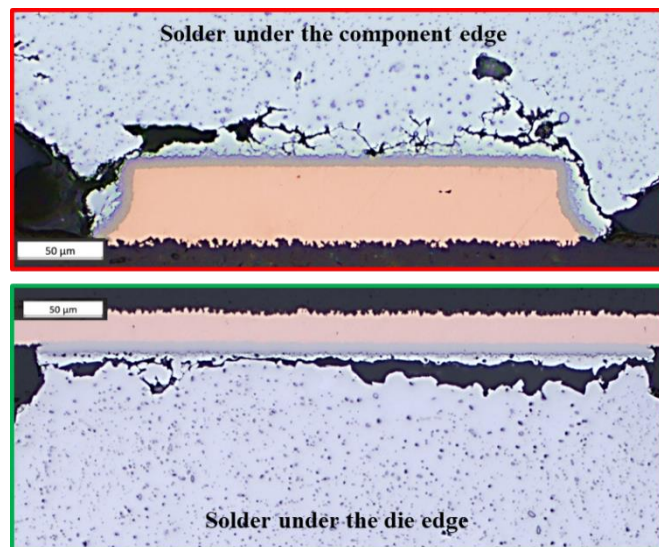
Total cracks observation on the BGA corner solder and
